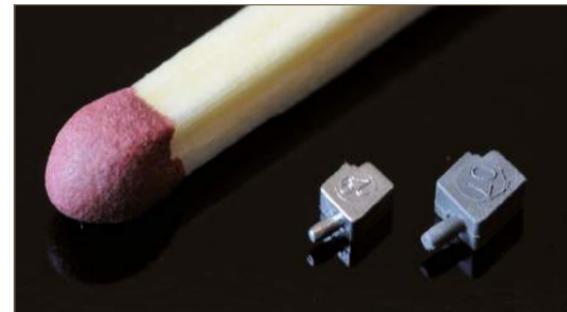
OBE's MIM locking device in the sintered and green state. The cavity markings make it easy to trace any damage in the tooling
